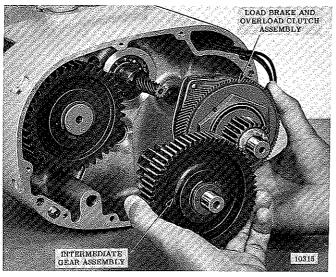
Removing Load Brake and Clutch and Intermediate Gear Subassemblies
